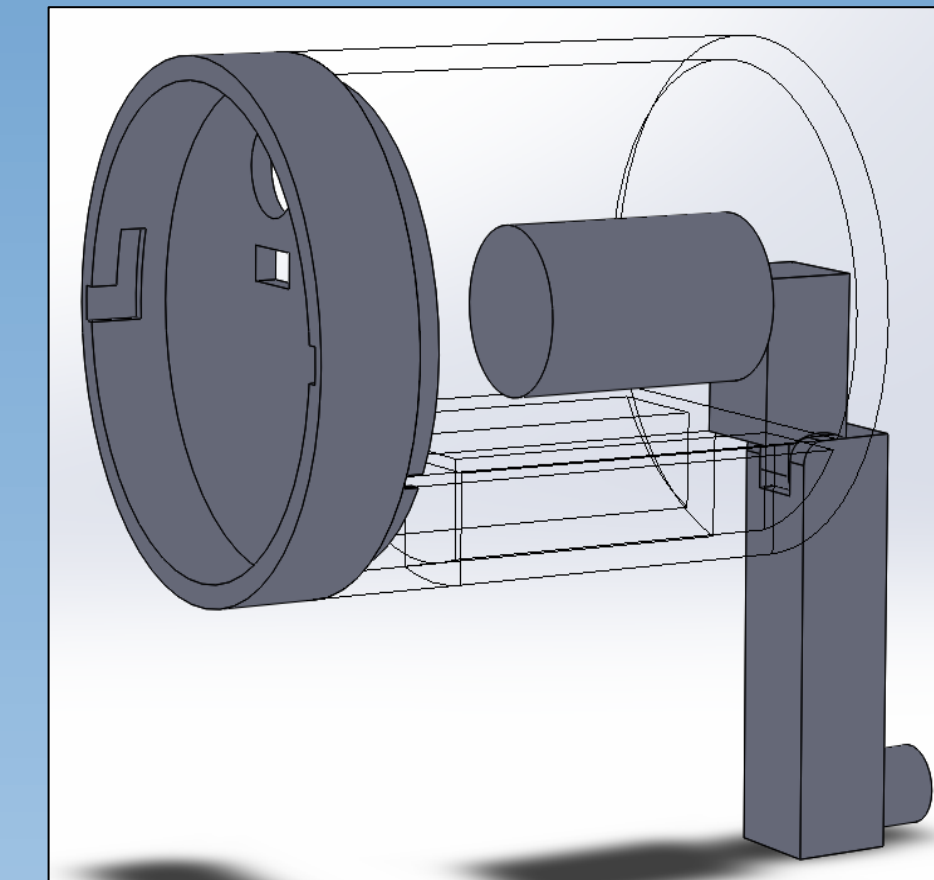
Front/Side view with handle extended; wireframe shows the internal motor
